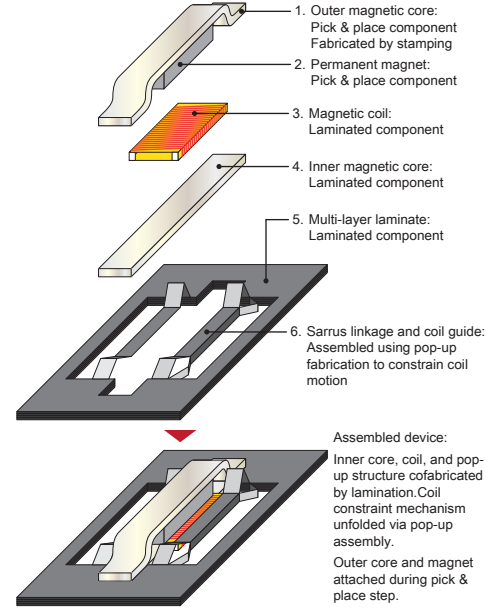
A design that incorporates a flexure-based linear bearing to constrain coil motion, eliminating friction between the coil and the core.
